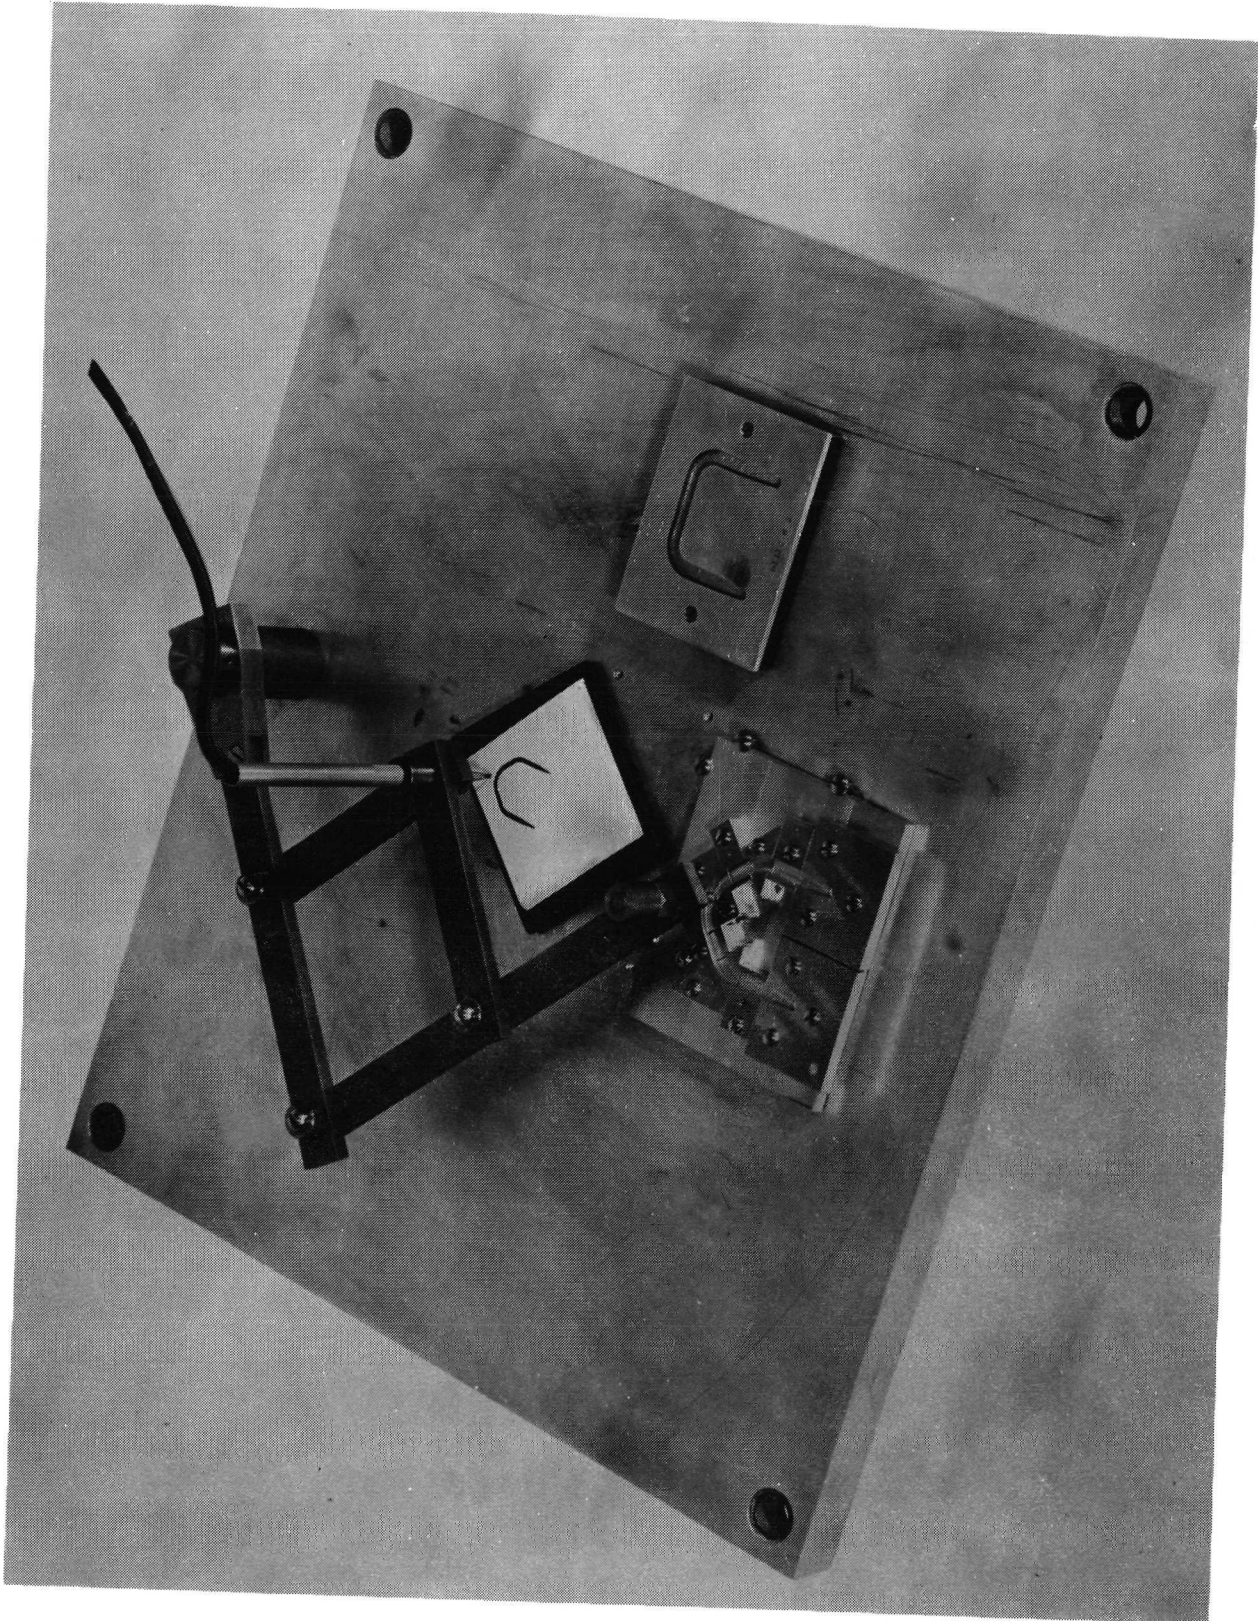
A PANTOGRAPH FOR FABRICATION OF WAVEGUIDES USING ABRASIVE MACHINING
